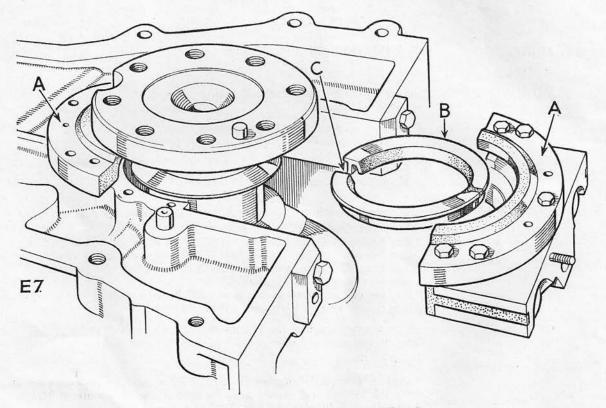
Fitting retainer halves and oil seal. A-Retainer halves. B-Split oil seal. C-Split line of seal towards top of engine.
